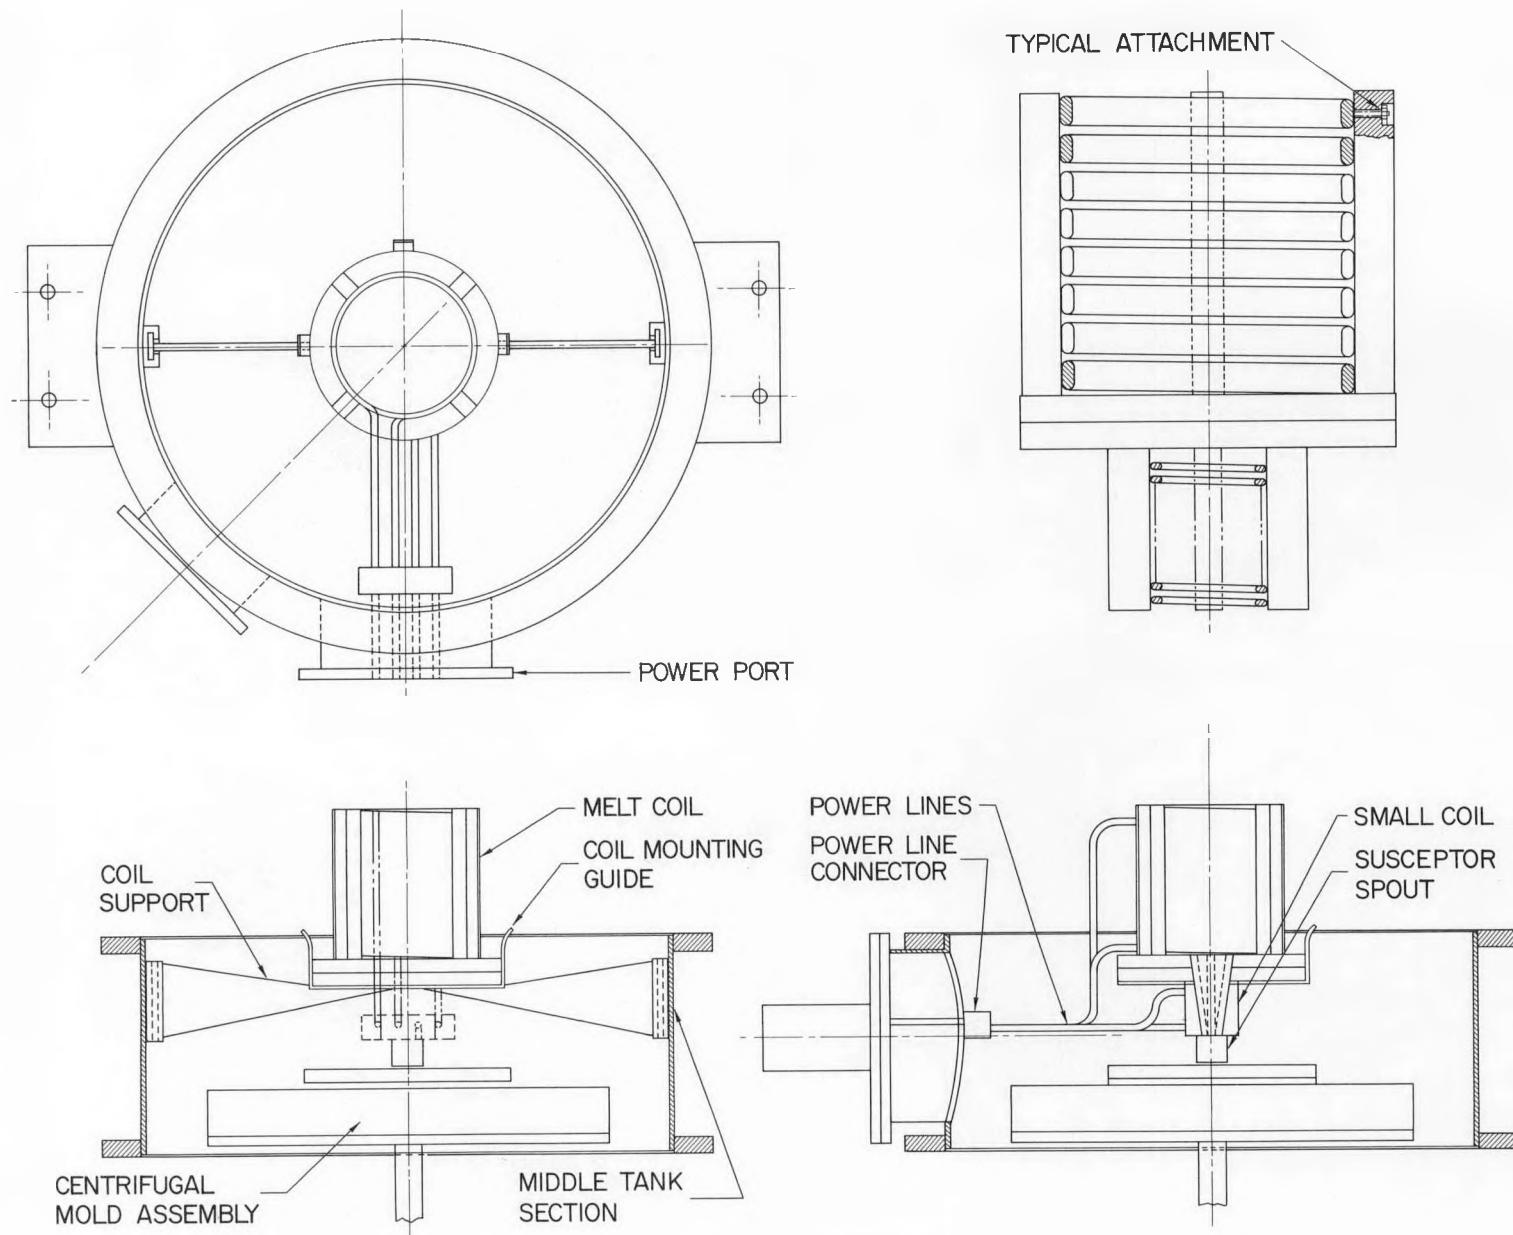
Conceptual Design of PRE In-Cell Vacuum Casting Furnace - Center Section
